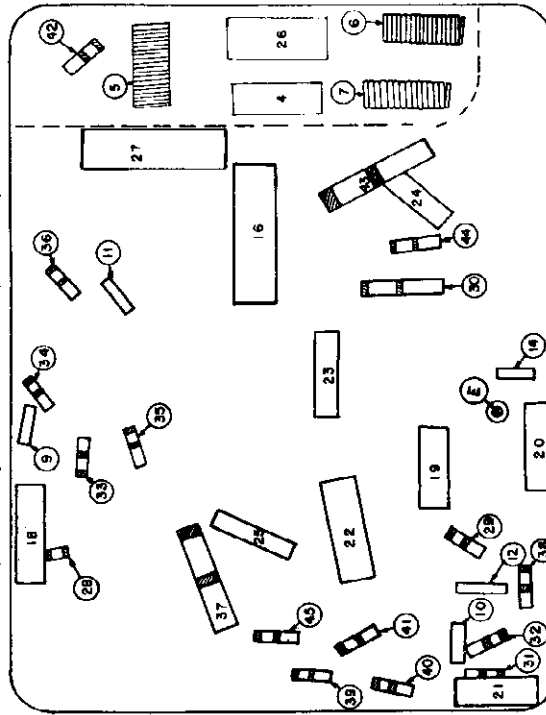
Parts Layout-Bottom View-Cadillac 1940 Rear Compartment Radio
